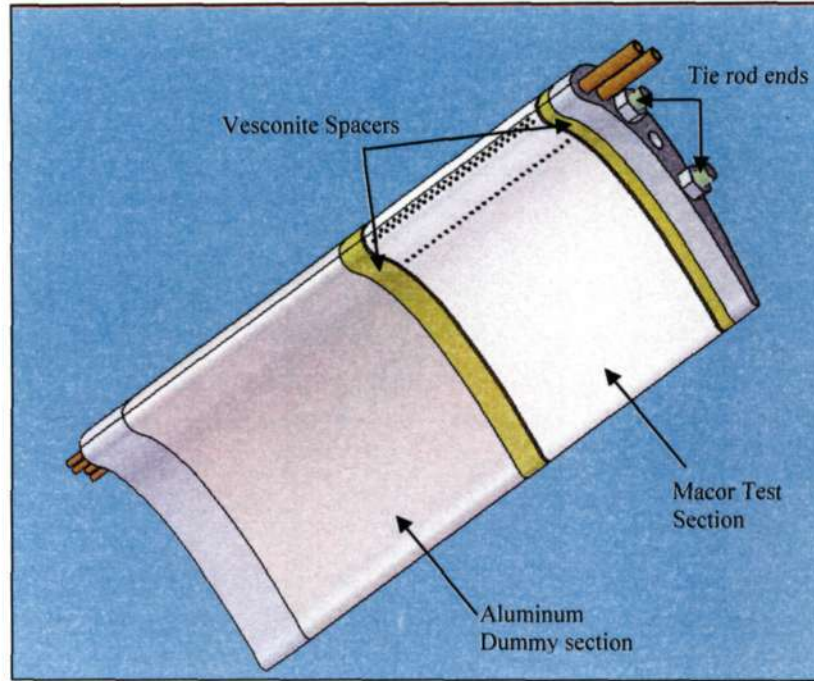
3-D view of the proposed film-cooled heat transfer blade stack
